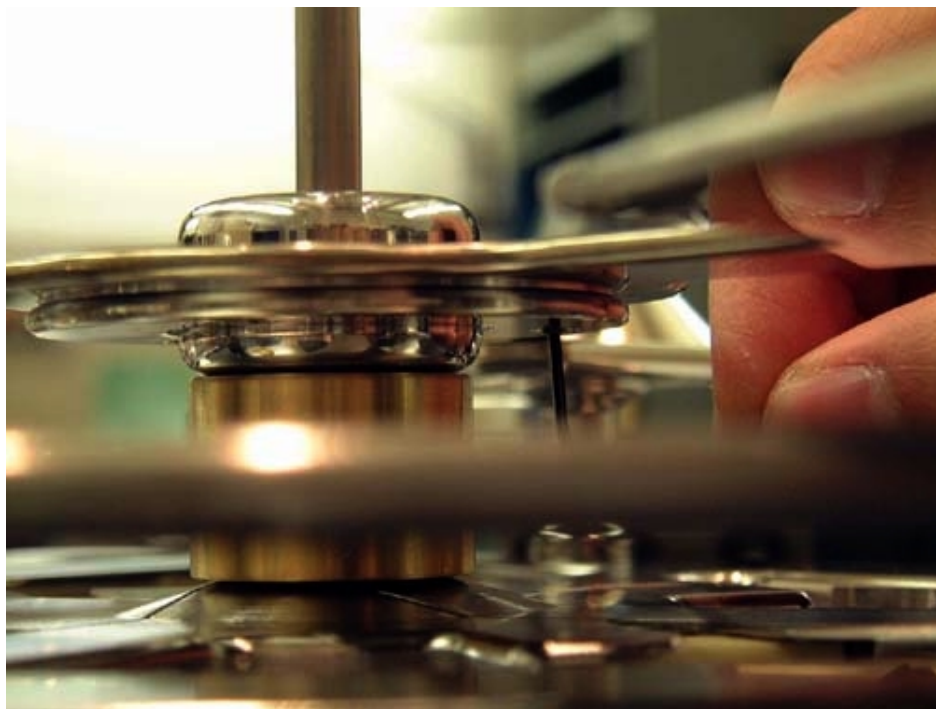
Then the aperture clamp ring bolts were tightened as well, to fix the aperture's alignment and position.
